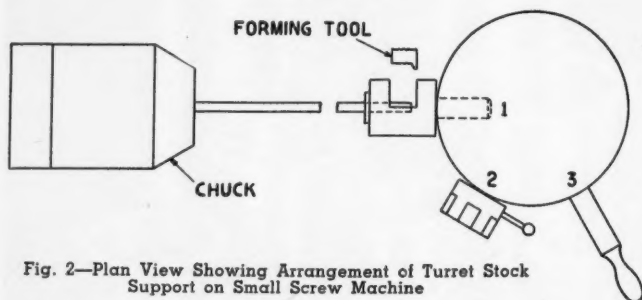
Plan View Showing Arrangement of Turret Stock Support on Small Screw Machine
